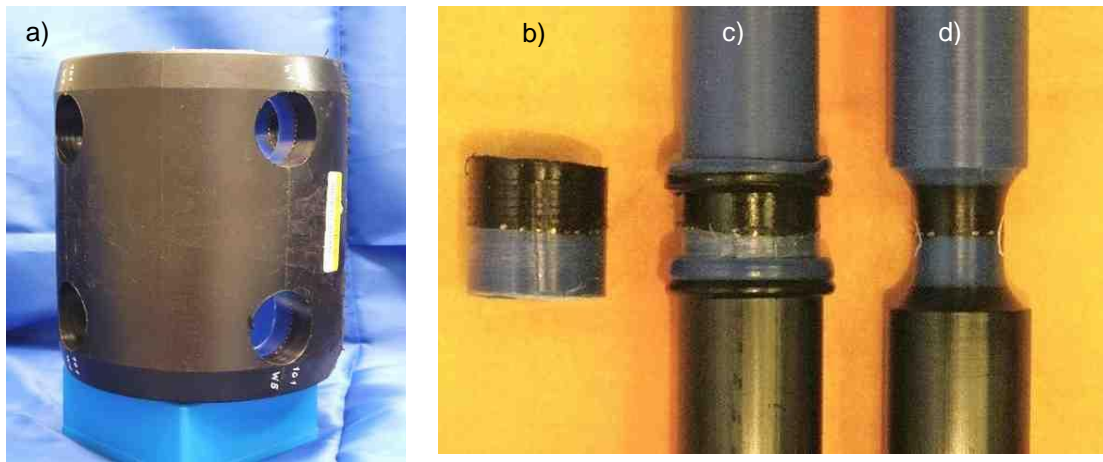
Preparation of specimens for the tensile creep test: a) welded EF joint showing positions from where “cork” specimens were cut; b) cork specimen; c) extension bars hot plate welded to cork specimens; d) final specimen waisted at the EF weld interface.
